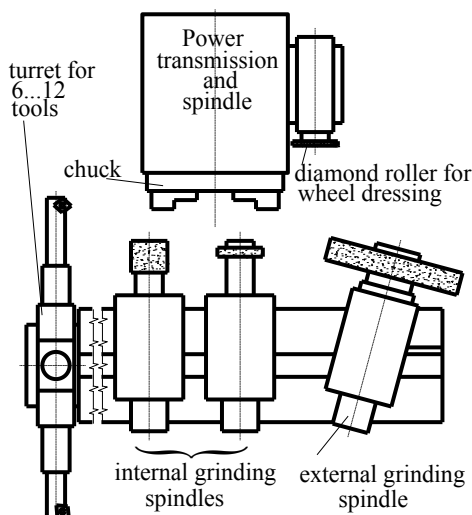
Scheme of the working area of a combined machine-tool for machining disc-type components (Schaudt "Kombi Grind" [1])
